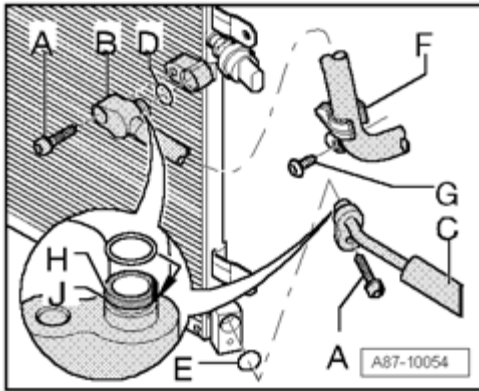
Screwing Out Bolts And Disconnecting Refrigerant Pipes From Condenser
